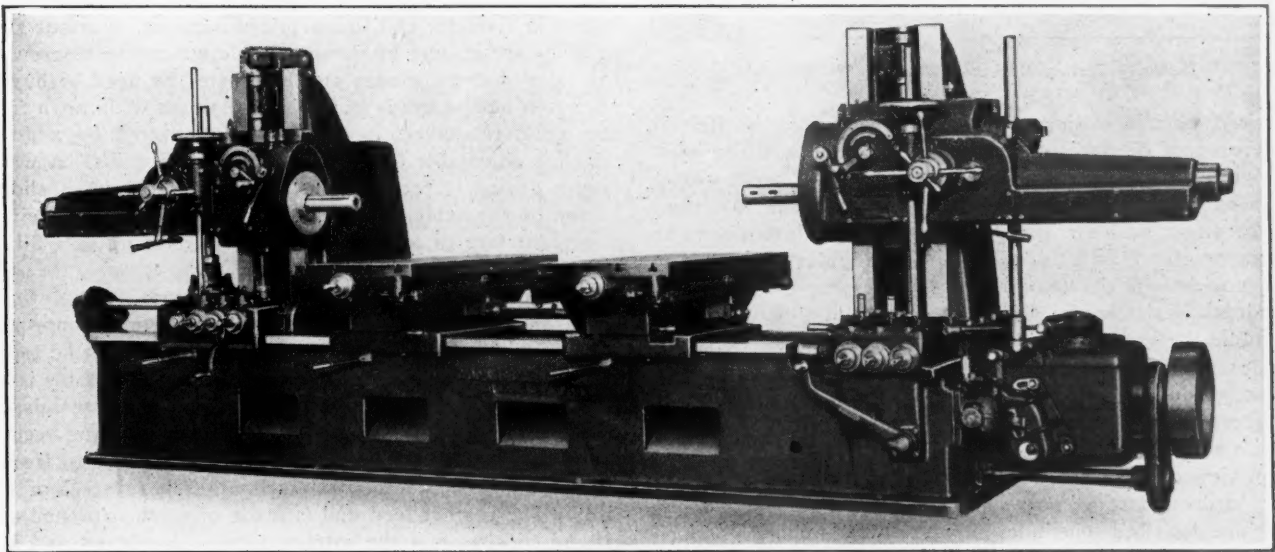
Giddings & Lewis Duplex Boring, Drilling, and Milling Machine equipped with Opposed Spindles and Two Work-tables
